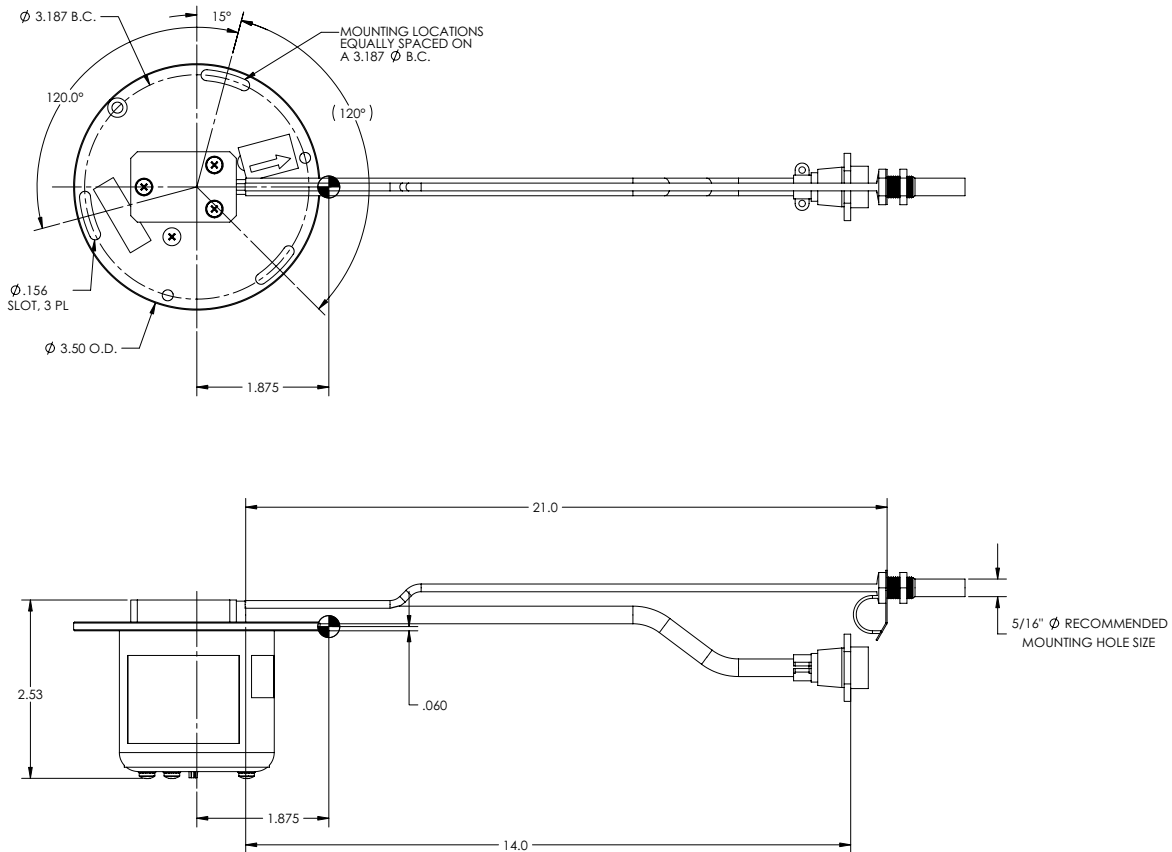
700-00011-000 Magnetometer/OAT Sensor Dimensions
